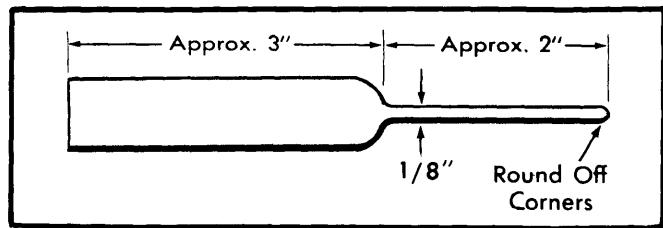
Rear Main Bearing Oil Seal Installing Tool
